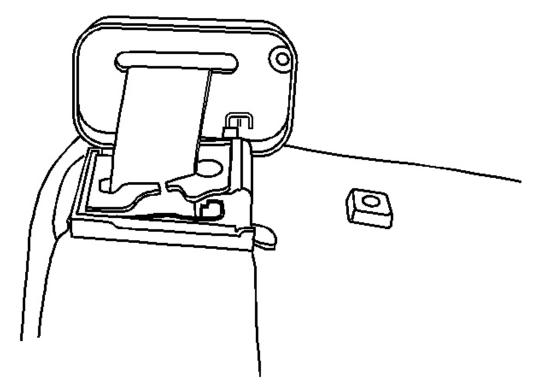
View Of Seat Belt At Retractor Bracket Courtesy of GENERAL MOTORS CORP.
